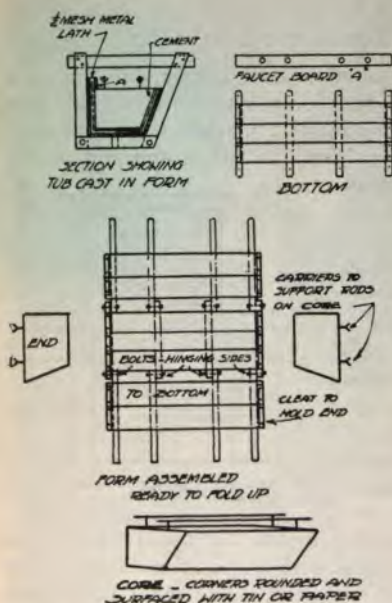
DETAILS OF HOME-MADE MOLD FOR LAUNDRY TRAY—SHOWN AS AN EXAMPLE OF WOOD MOLD IN WHICH SIDES ARE HINGED TO BOTTOM BY MEANS OF BOLTS
